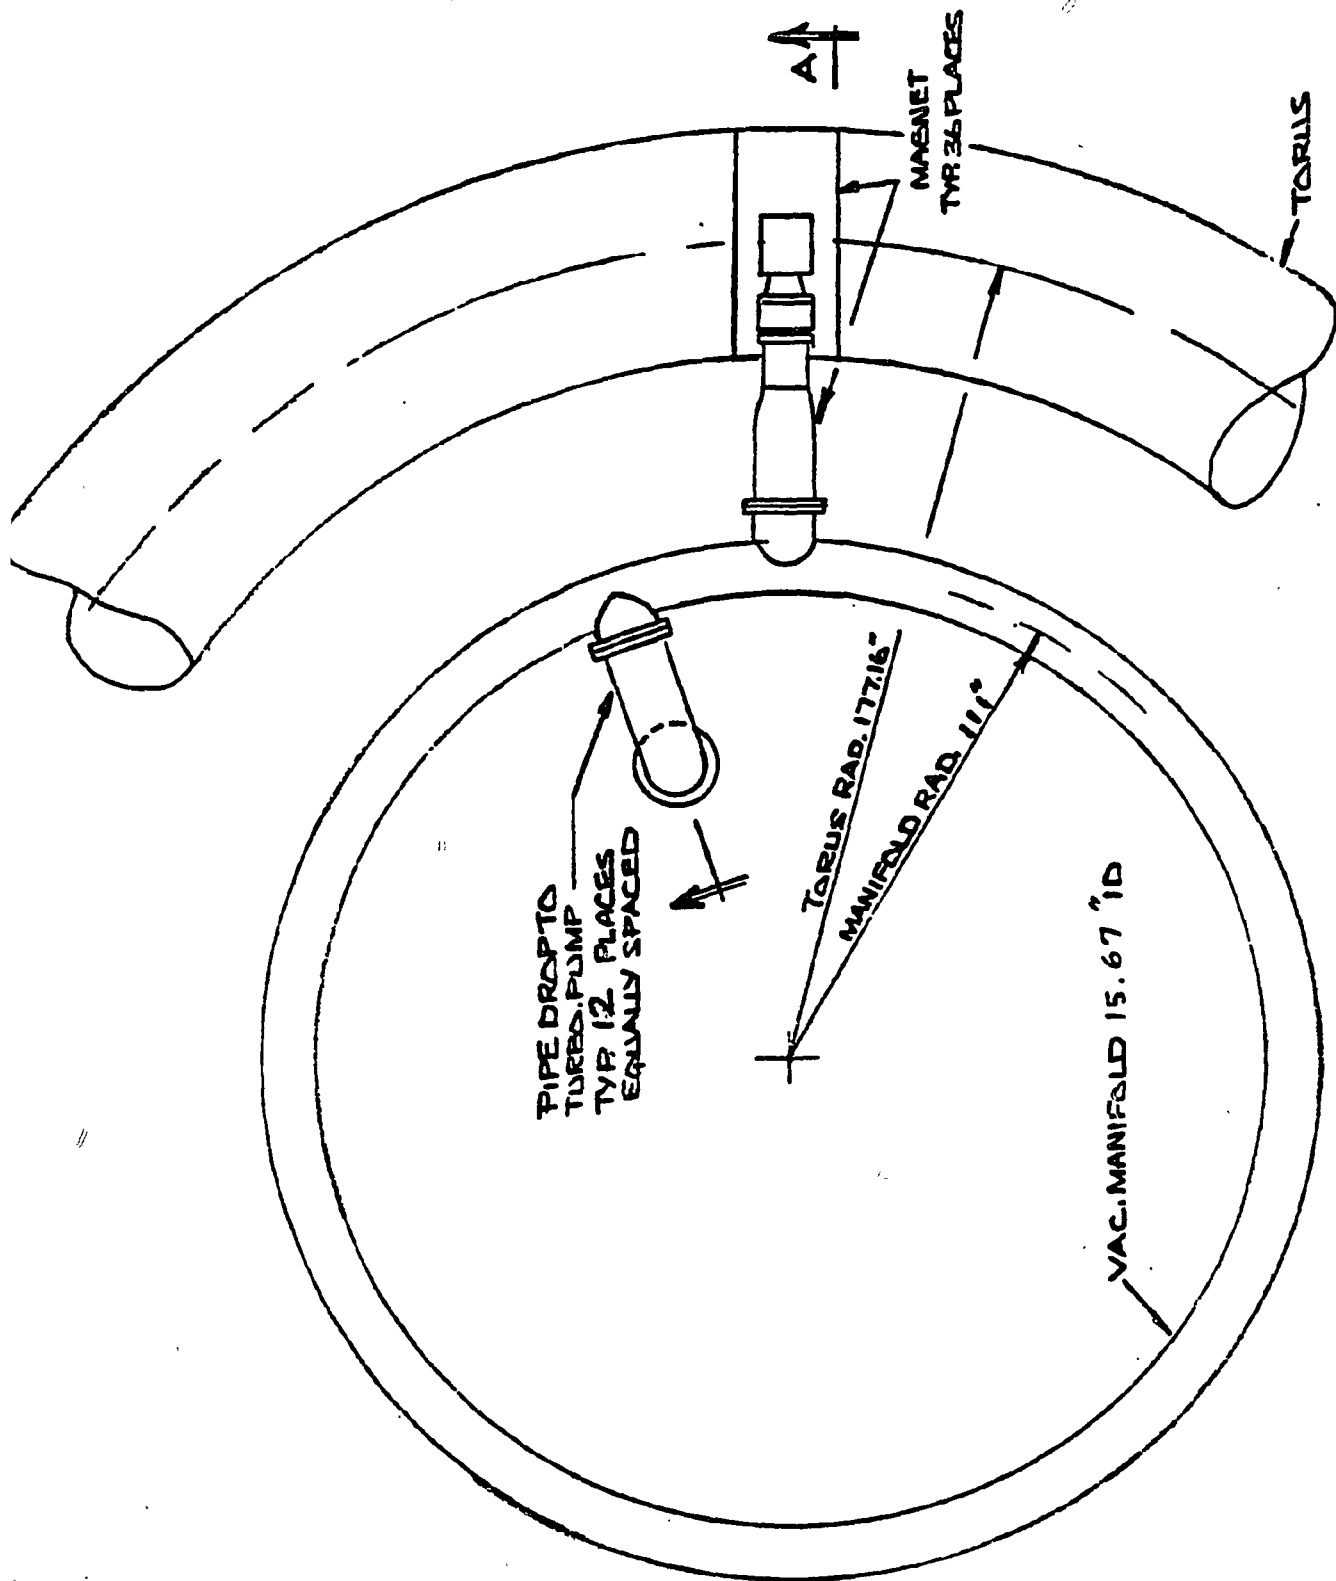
MC DEVAR TMP 3500 SYSTEM, INBOARD MANIFOLD - PLAN VIEW
